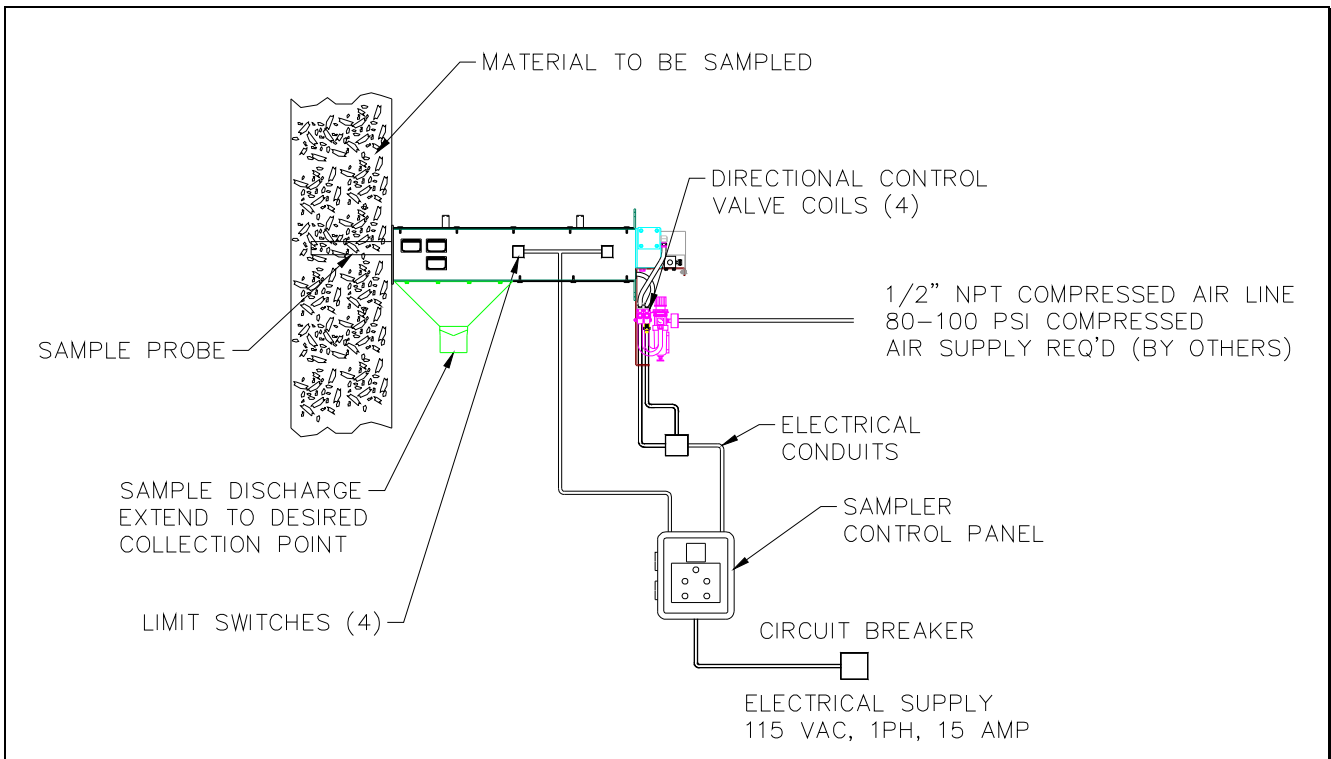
, TYPICAL INSTALLATION, MODEL PRT SAMPLING SYSTEM
